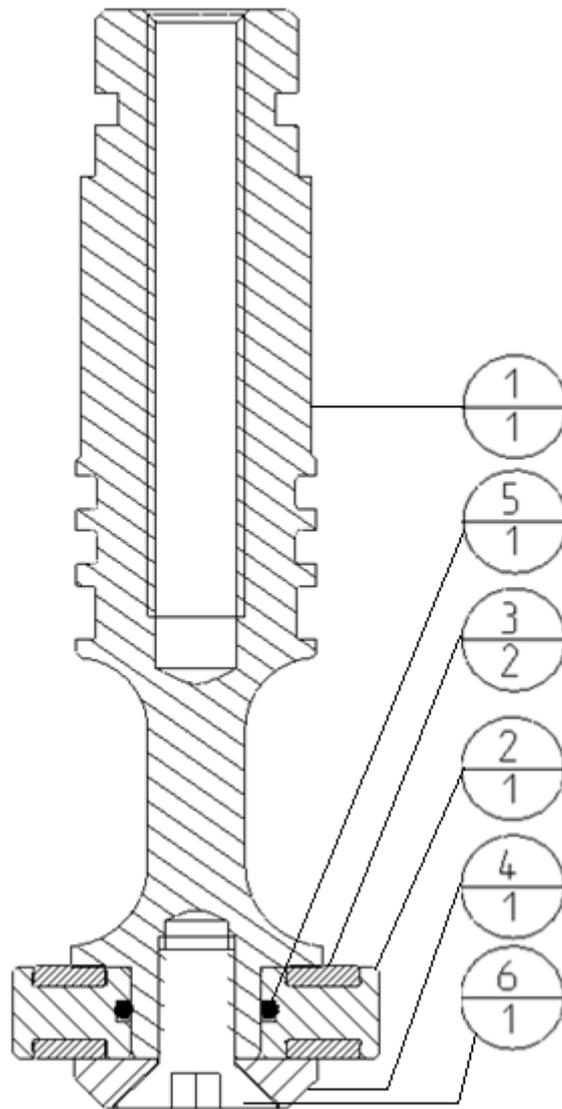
Spool assembly CO 3 way pneumatic valve size 1" ½: stainless steel machining
